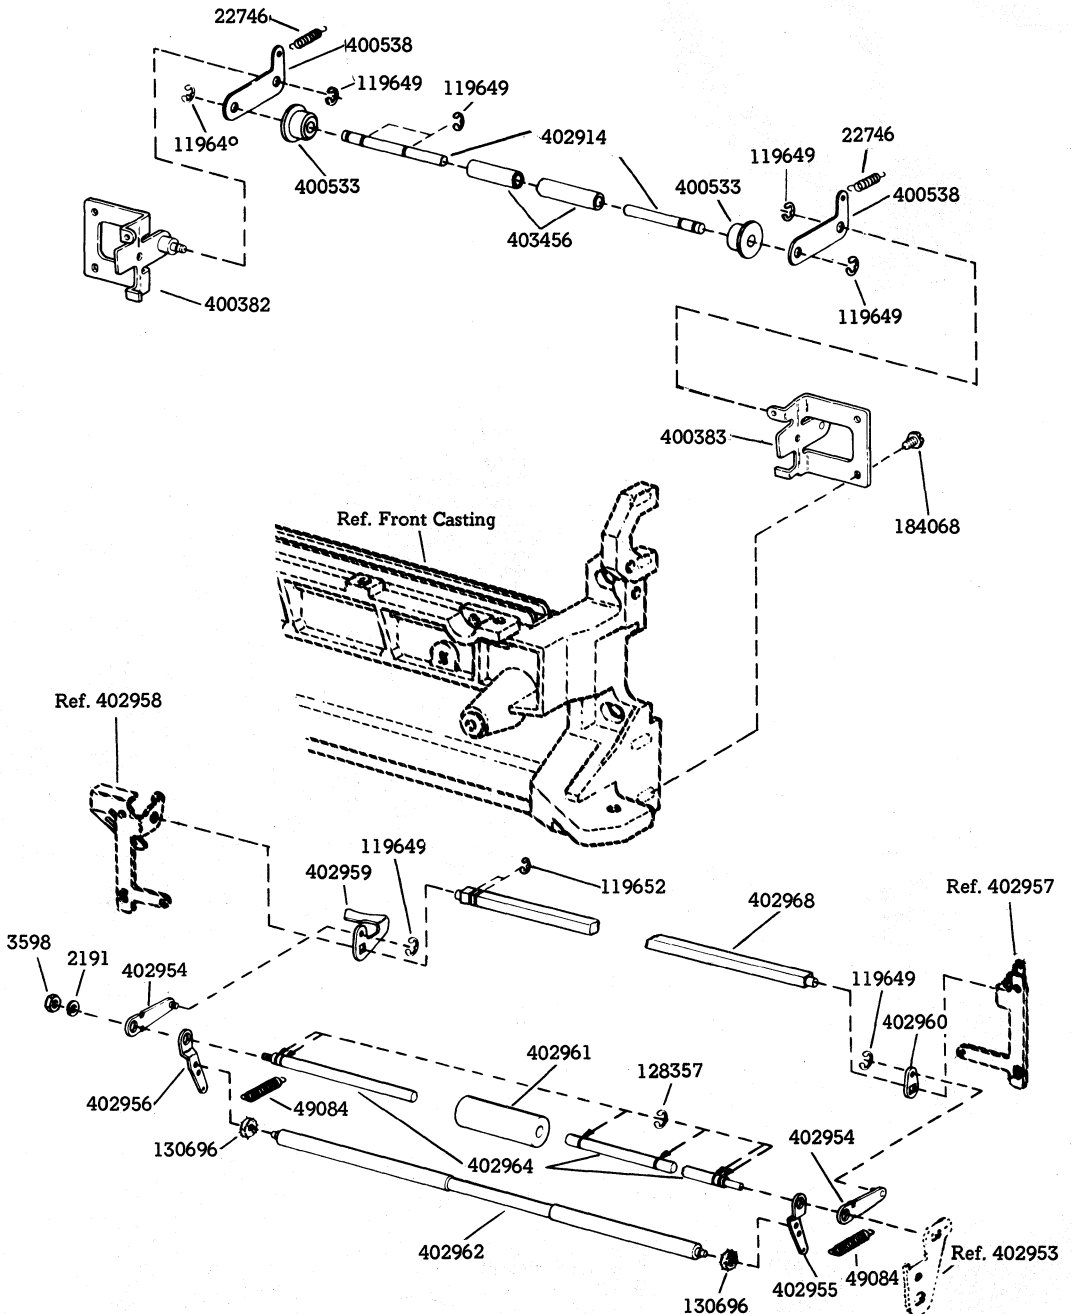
Front Casting Assembly (Friction Feed - 40P102) (Cont.)
